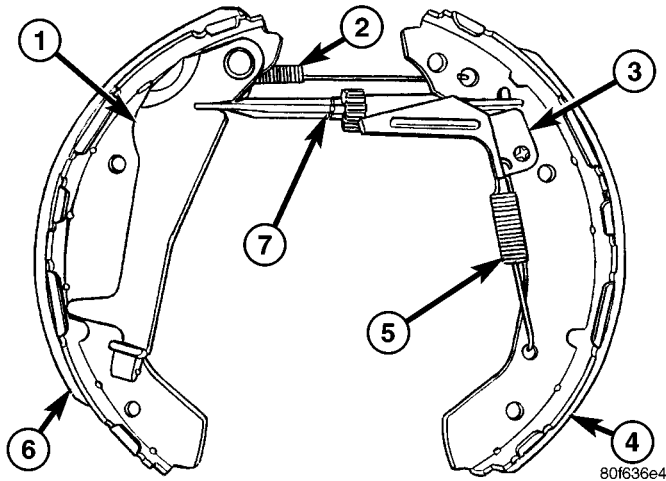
Bench Assembled Brake Shoes (Right Side Shown)
